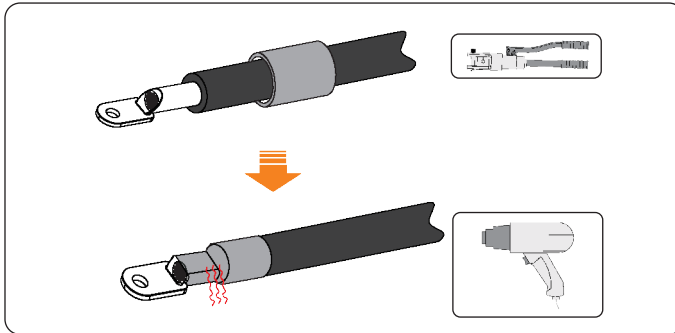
Crimping the terminal and heating the heat-shrink tubing
